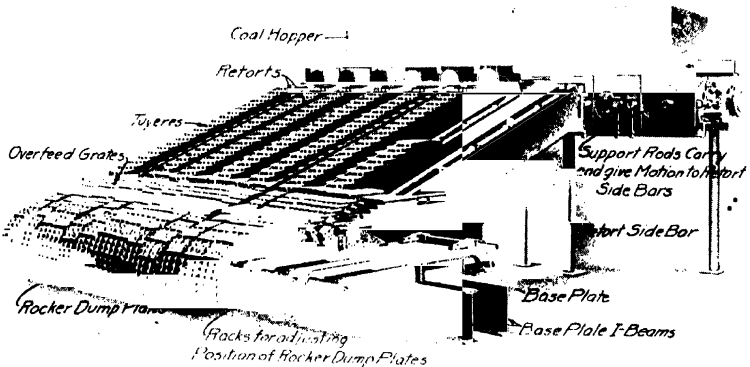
Perspective View of a 9-Retort Riley Underfeed Stoker.
